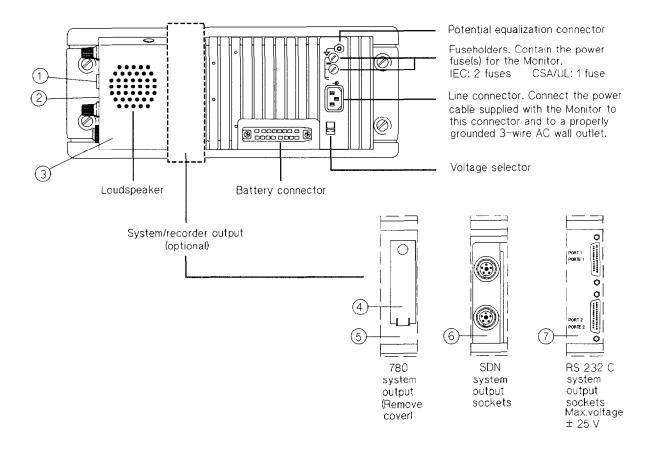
Rear Panel Mechanical Parts/Chasis
